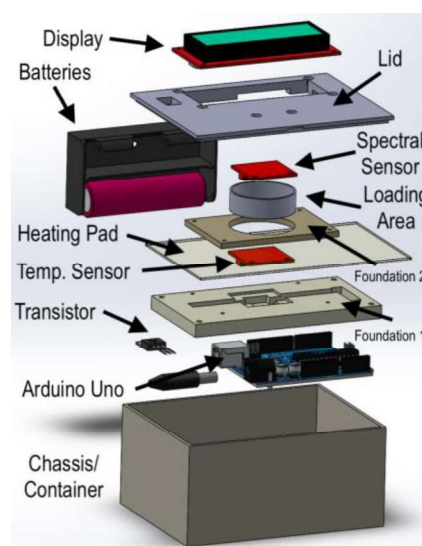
The prototype of the newly fabricated biosensor using CAD software. (Exploded View)
